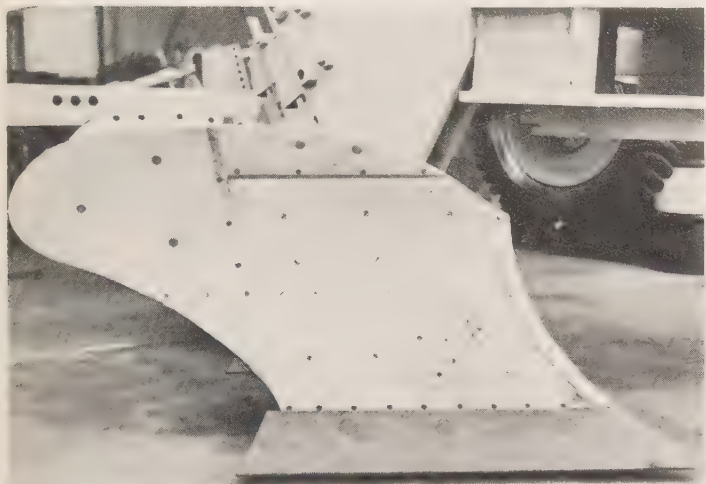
Moldboard for 32-inch bottom cut from section of 47-inch diameter cylinder, showing final pattern and attachment of scouring material.
